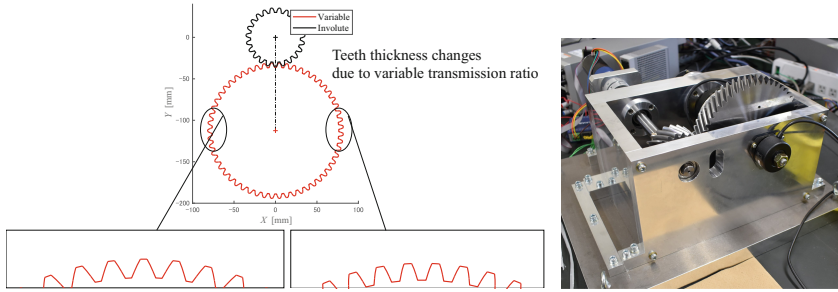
Left figure shows a cylindrical variable ratio gear pair of numerical example. The above gear is involute gear and the below gear is cylindrical variable ratio gear. Teeth thickness changes due to variable transmission ratio. Right figure shows the experimental setup for a cylindrical variable ratio gear pair. The pinion on the left side is an involute gear, and the gear on the right side is a cylindrical variable ratio gear.
